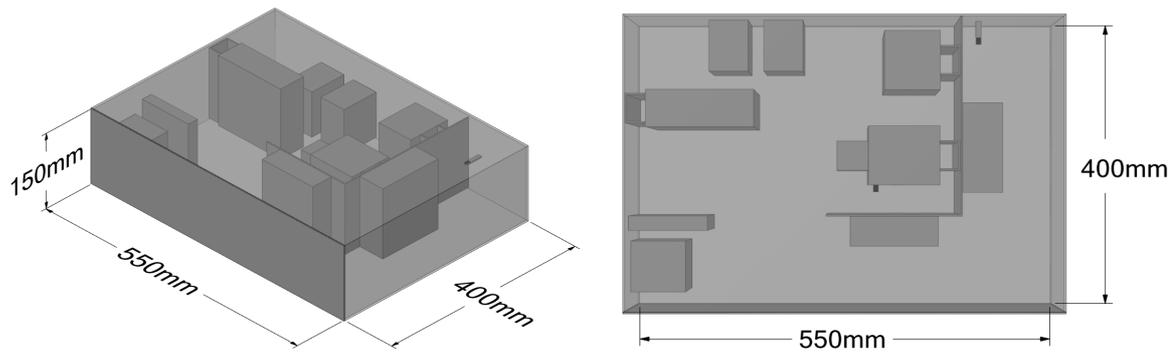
37kW DOL Starter Module Geometry Isometric and Layout
